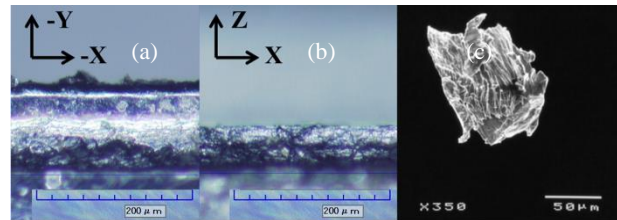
bottom (a) and side (b) view of machined surface and chip (c) on  $rd$  200 $\mu\text{m}$
